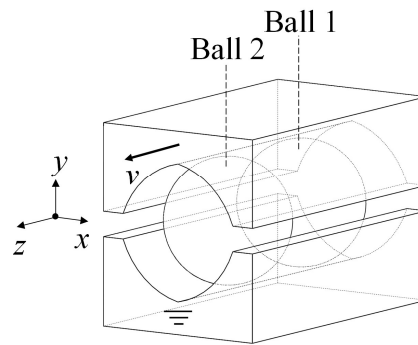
Basic module of two balls in a four-point-contact linear ball bearing
